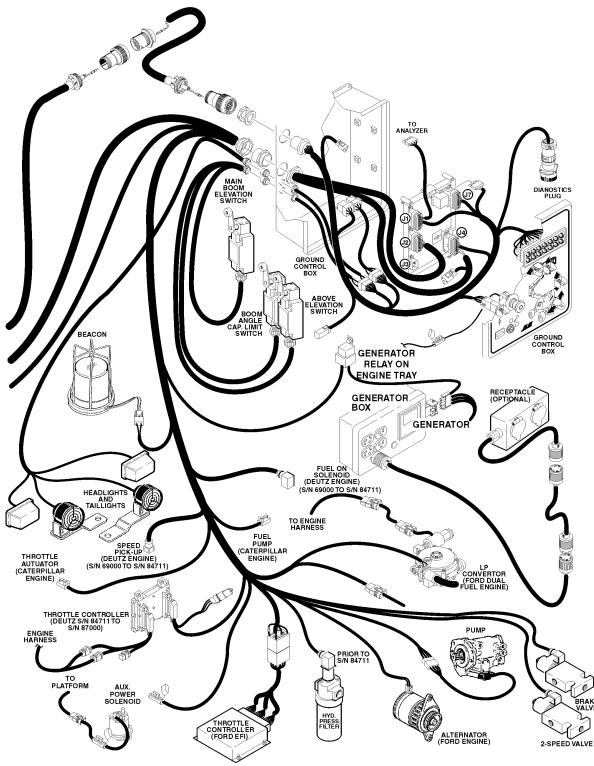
Electrical Harness - S/N 80000 to 87000 - Sheet 2 of 2
